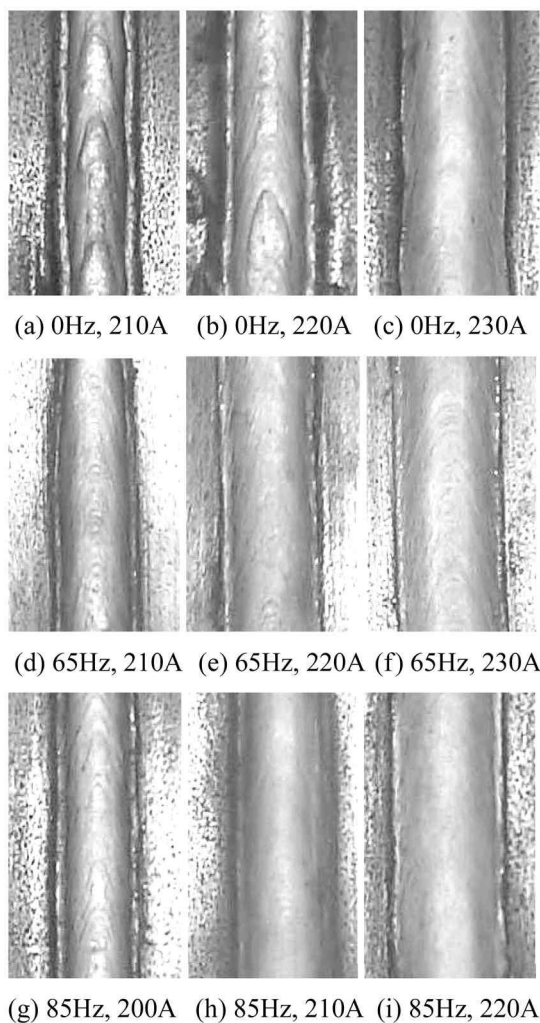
Macroscopic appearance of the weld beads produced at a wire-feeding rate of 100 mm/s under different welding currents and different wire oscillation frequencies
